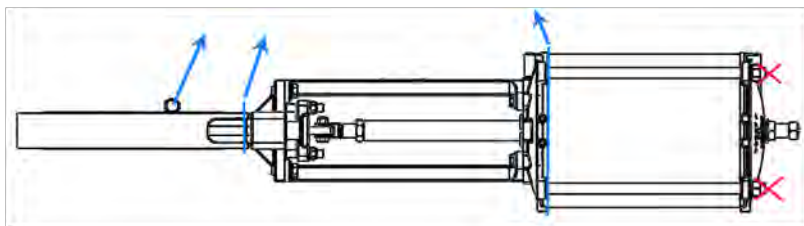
, Knife Gate Valve with Pneumatic Cylinder Actuator, Horizontal Lifting
